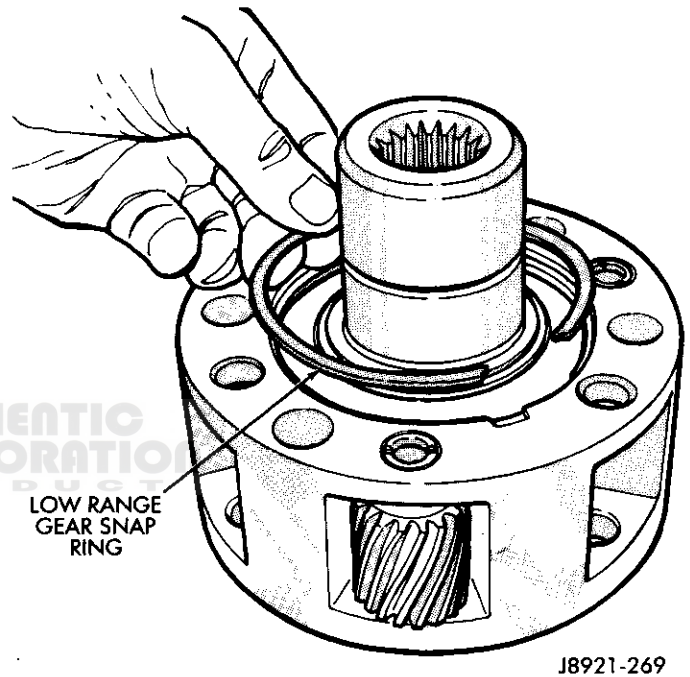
Removing/Installing Low Range Gear Snap Ring
